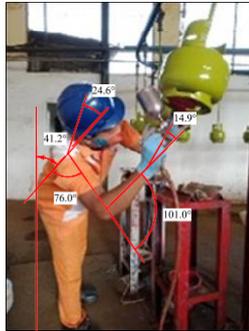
Body Posture Assessment for Printing the Bottom of the Tube
